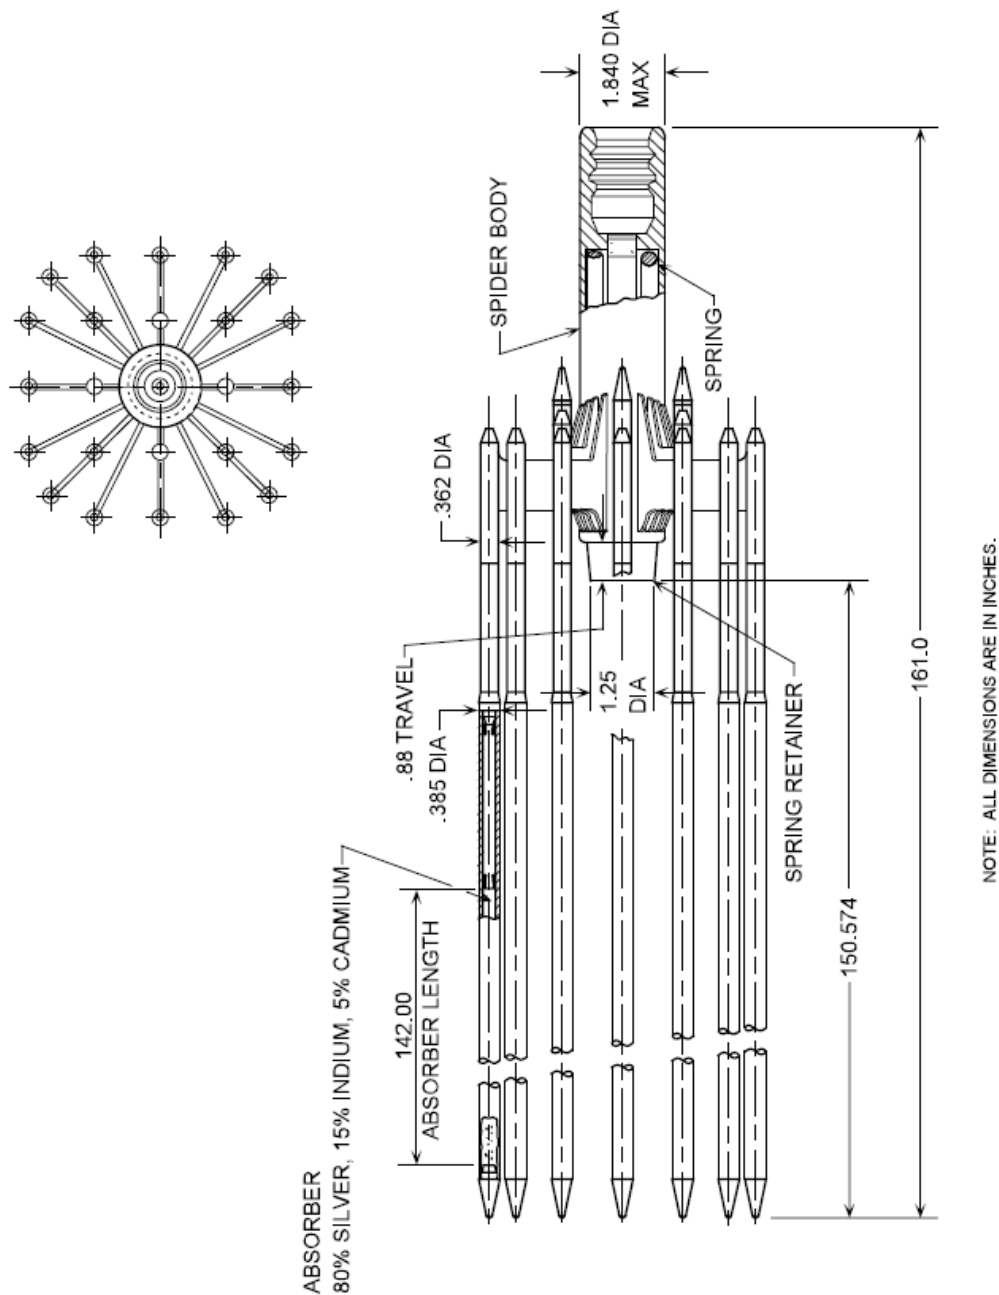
Sectional view of a typical Rod Cluster-Control Assembly (RCCA) [21]
